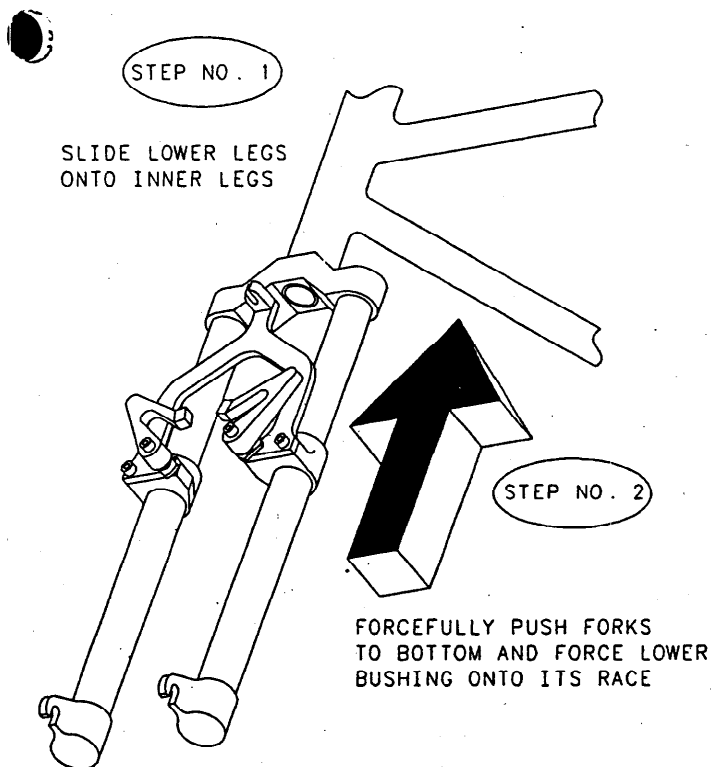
Fork Leg Assembly Schematic (right leg, arch & other parts removed for clarity)
